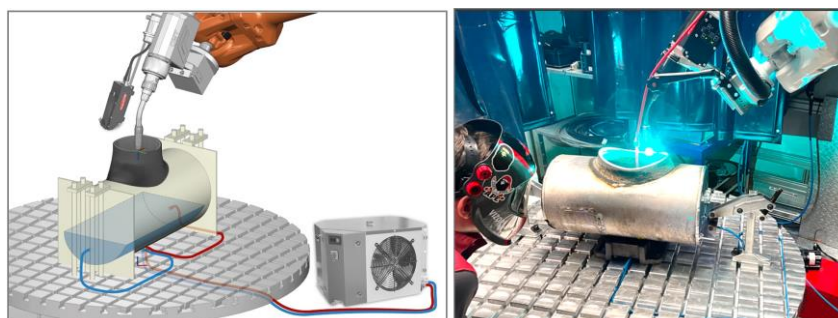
Welding setup with component cooling and process triggered camera
